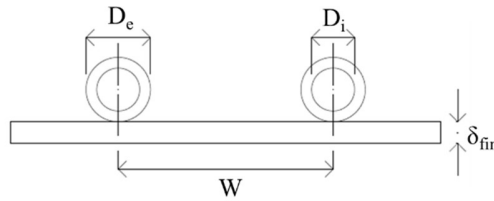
Plate and tube dimensions - Evaporator/Collector.
